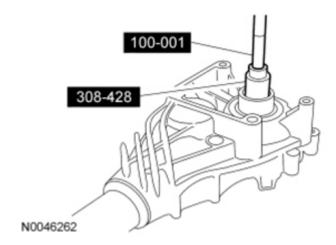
Removing Intermediate Shaft Seal Using Halfshaft Oil Seal Remover And Slide Hammer Courtesy of FORD MOTOR CO.
